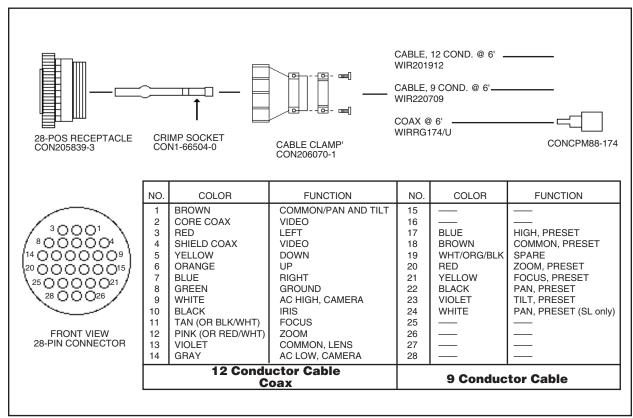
Mating Cable Assembly Configuration (PP Versions)
